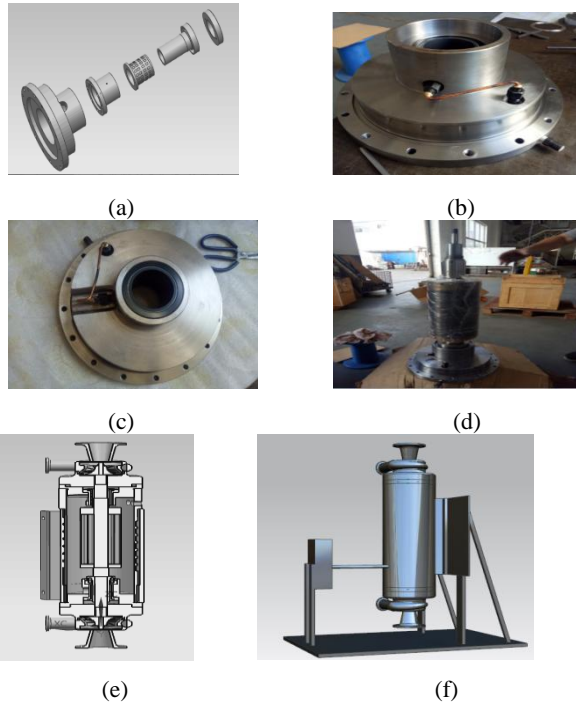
Virtual assembly of permanent magnet gas suspension bearing and generator
